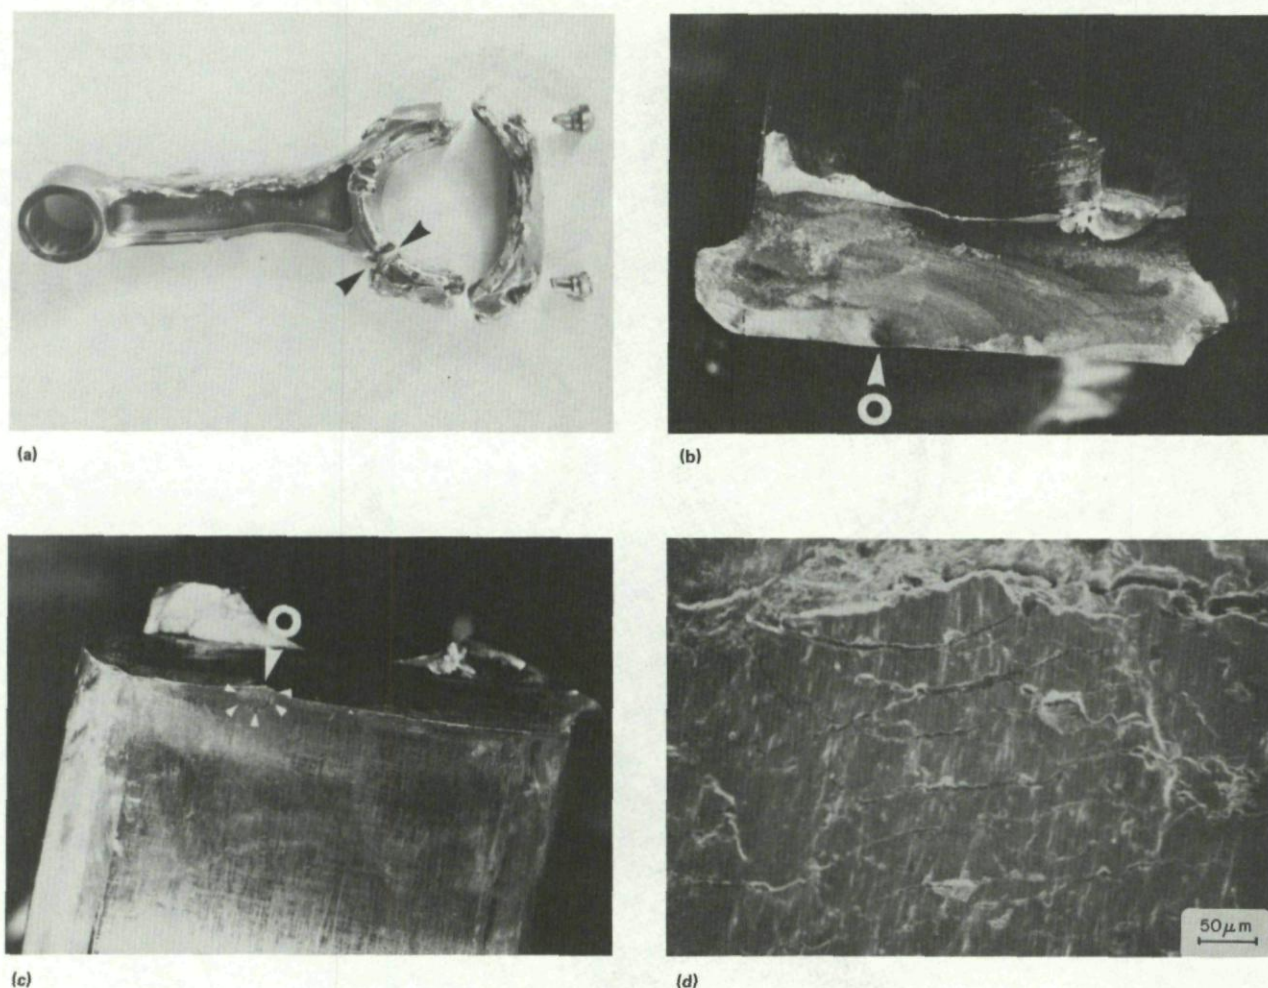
Fretting corrosion and fatigue of a helicopter engine connecting rod
